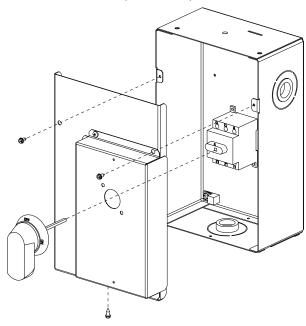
Handle and Shaft Assembly for NFD (Size 16)
